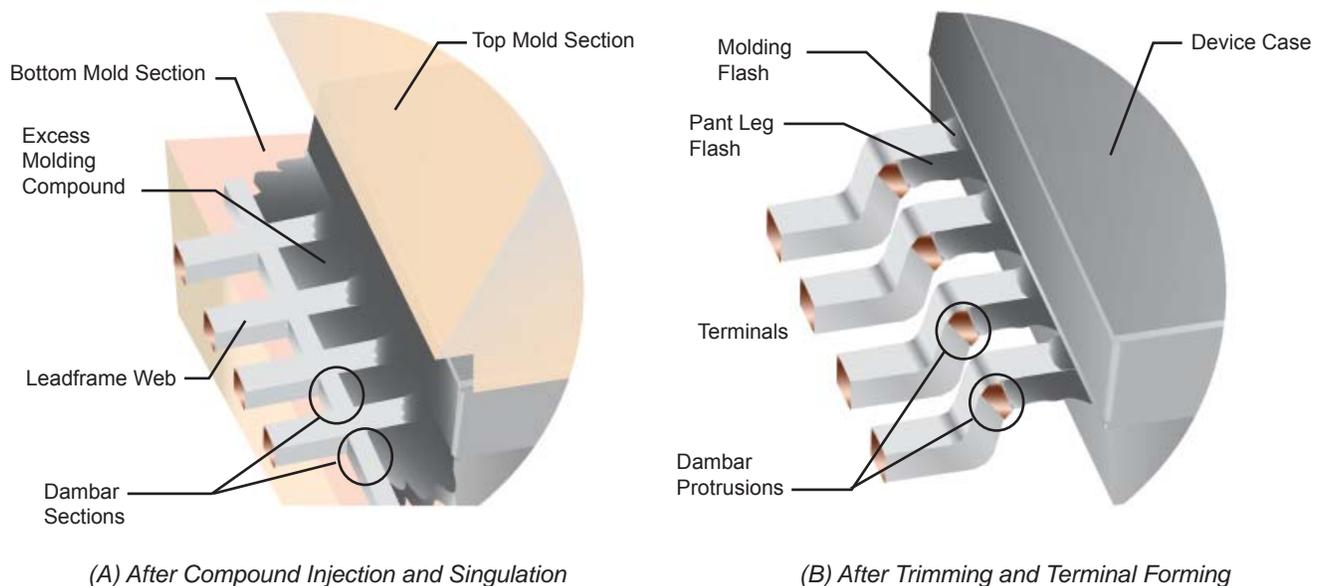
Molding Flash. Case molds have upper and lower halves, which allow flash, the small amount of excess molding compound that remains after the device is ejected from the mold and the device is singulated and trimmed. Interlead flash is allowed between the case and the dambar protrusion, and is away from the critical soldering areas.
